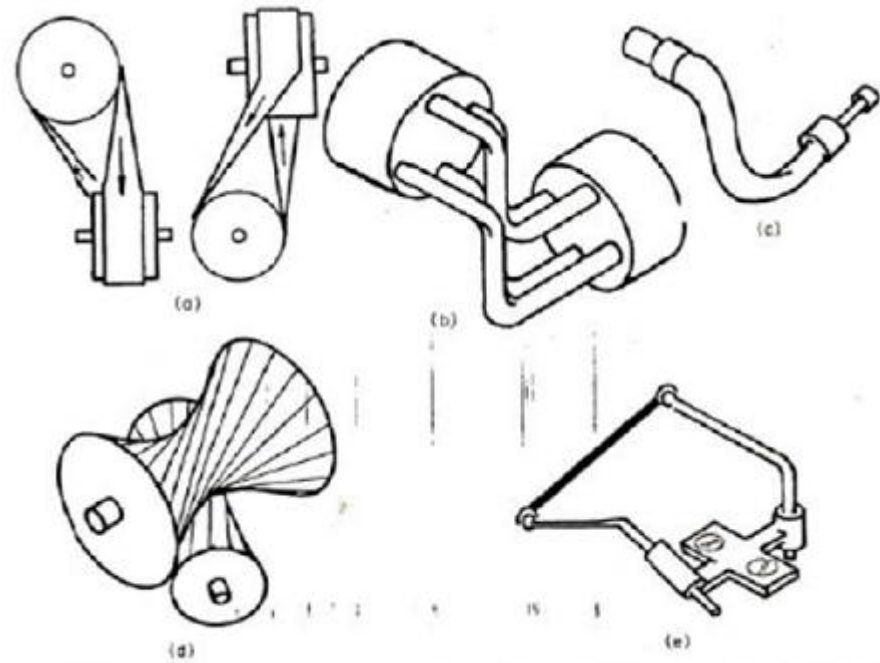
Couplings and connectors—skew shafts. (a) Flat belts; (b) spatial RCCR; (c) flexible shaft; (d) hypoid gears; (e) spatial RGGR.
